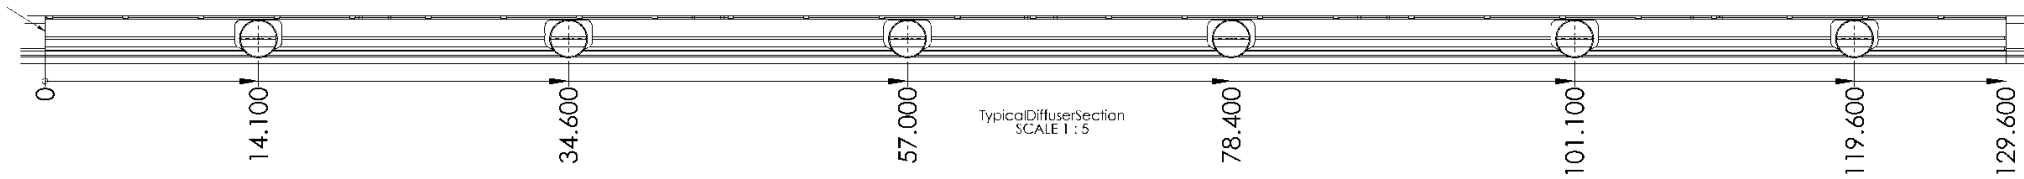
2D Drawing of Typical Diffuser Section. Supply hose locations. Dimensions in inches.
